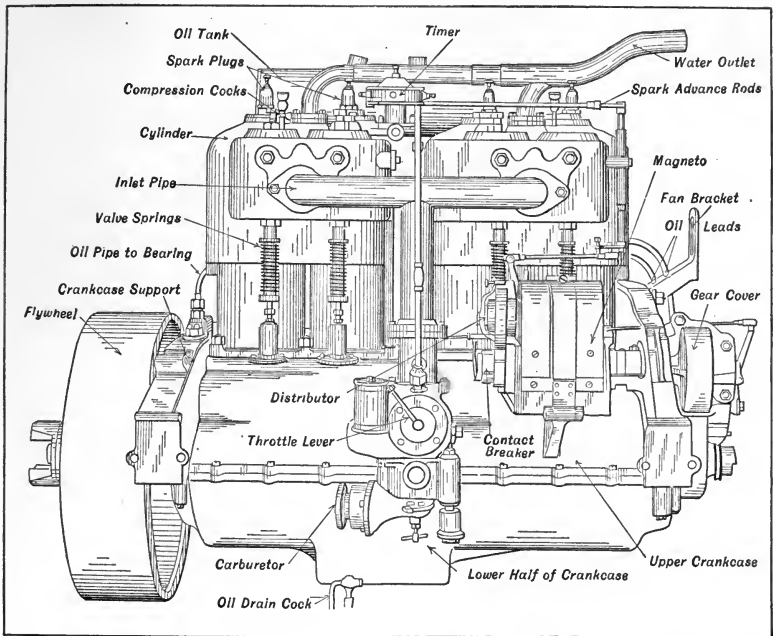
Typical Motor-Car Power Plant, Showing External Appearance and Location of Important Auxiliary Mechanisms.
